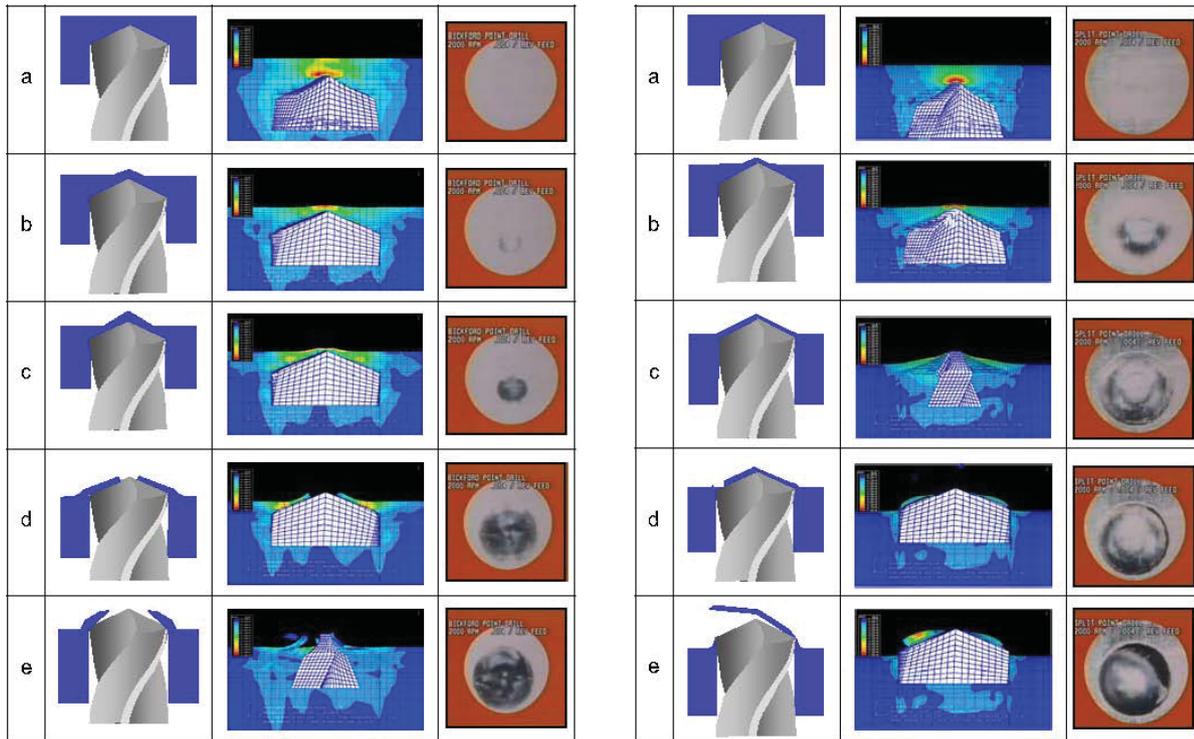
Burr formation mechanism of a crown burr — left picture, an uniform burr with a drilling cap — right picture [21].
